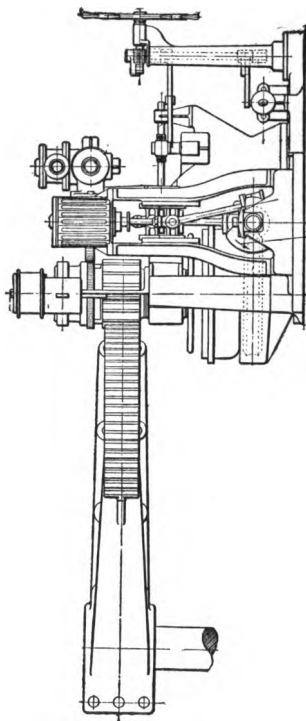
Elevation of Steering Engine Shown in Place on Page 621.
